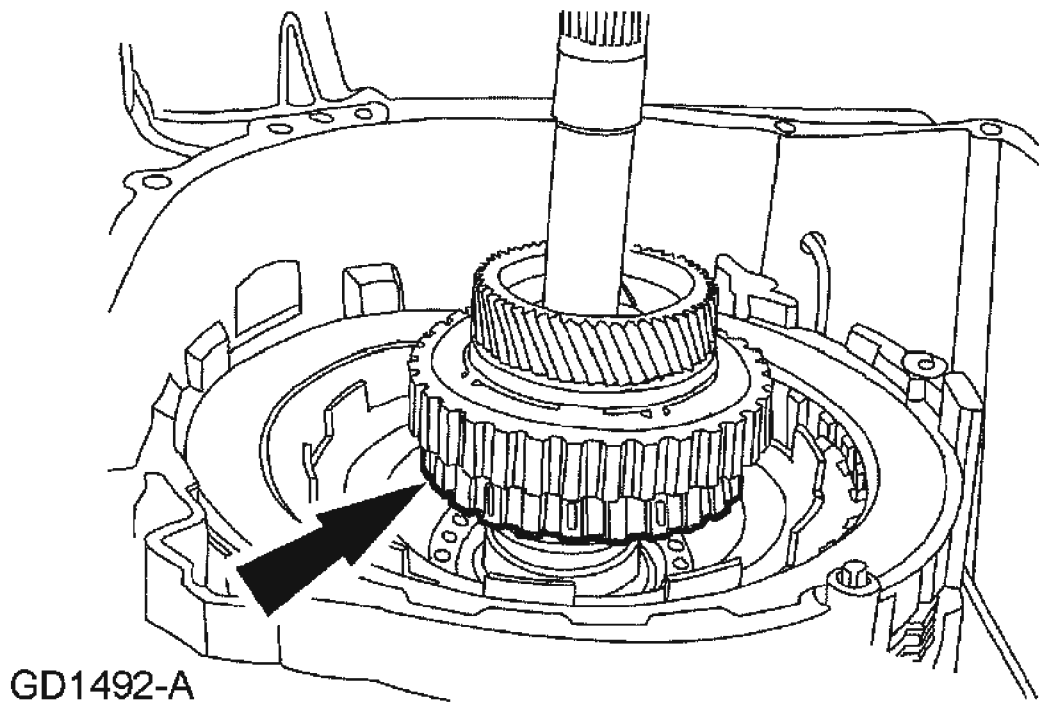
Removing Low/Intermediate Carrier Assembly
